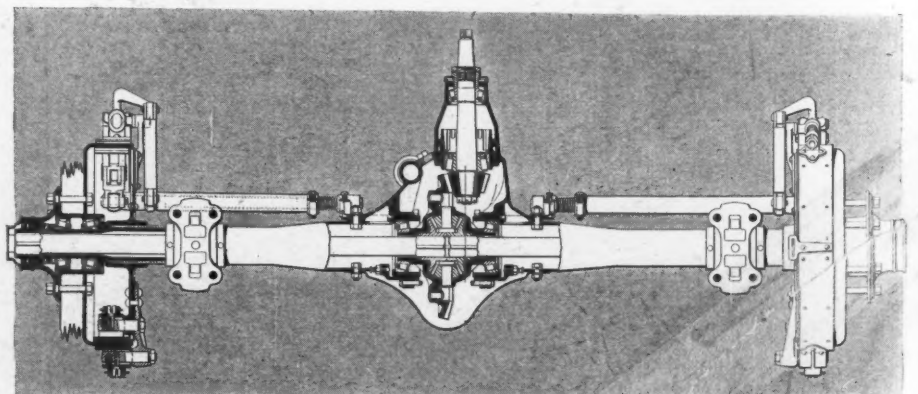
A SECTION OF THE NEW IMPROVED TIMKEN ROLLER BEARING AXLE WHICH IS A FLOATING TYPE
